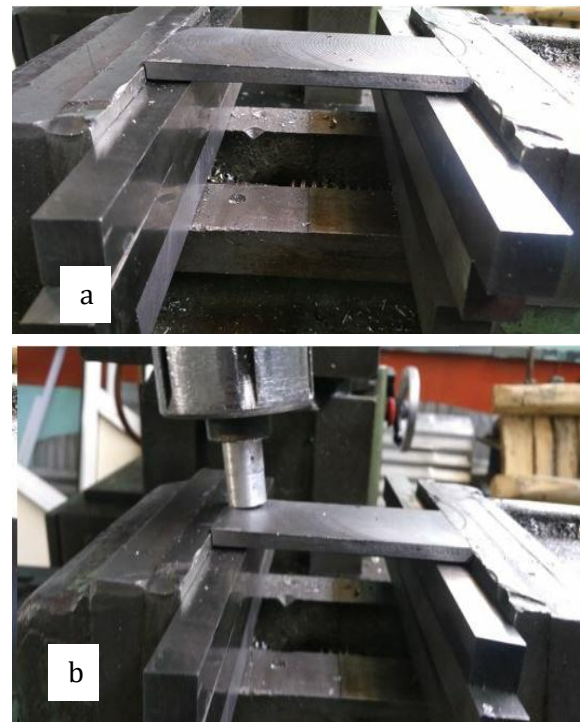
a) Clamping of the substrate on the table of the milling machine b) Mounting of the consumable rod on the milling machine
